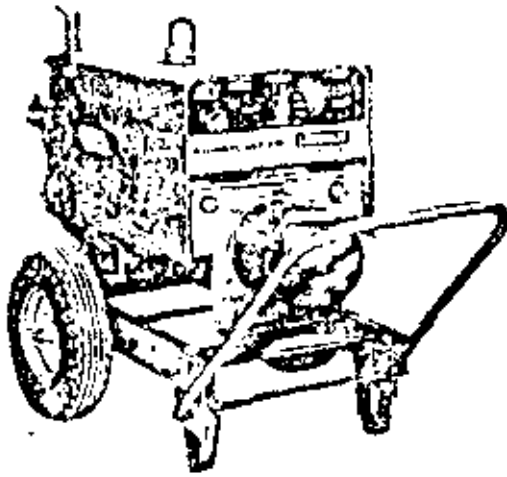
A typical engine-driven power source that supplies AC current for welding or power for lights and tools.
